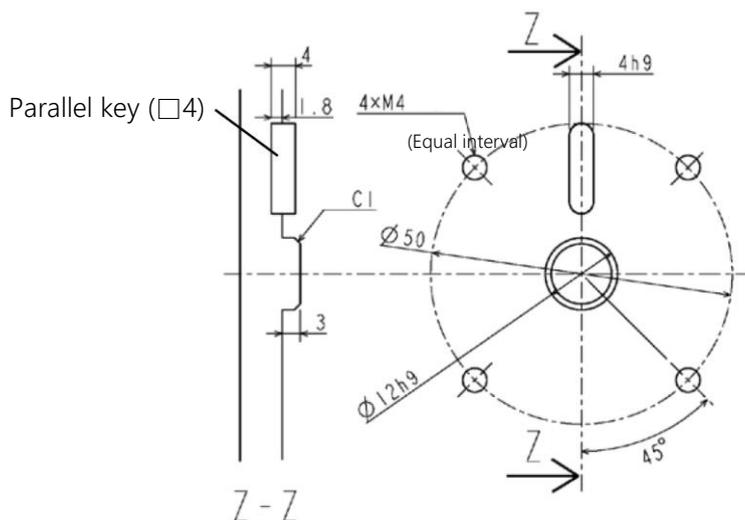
Example of Shape of Securing the Tool Flange (Optional)
